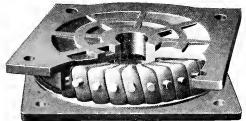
Roller Center Plate. Diameter of Roller Circle, 12 in; Number of Rollers, 40; Diameter, 2¹4 in.; Length, 3!4 in. Edwin S. Woods & Company.
